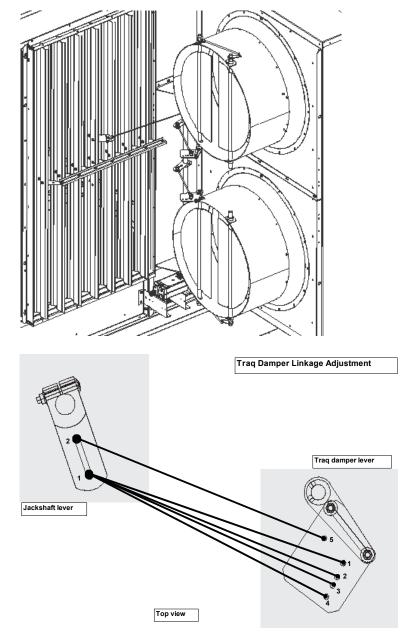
Fresh air and return air economizer assembly (w/Traq[™] dampers)
